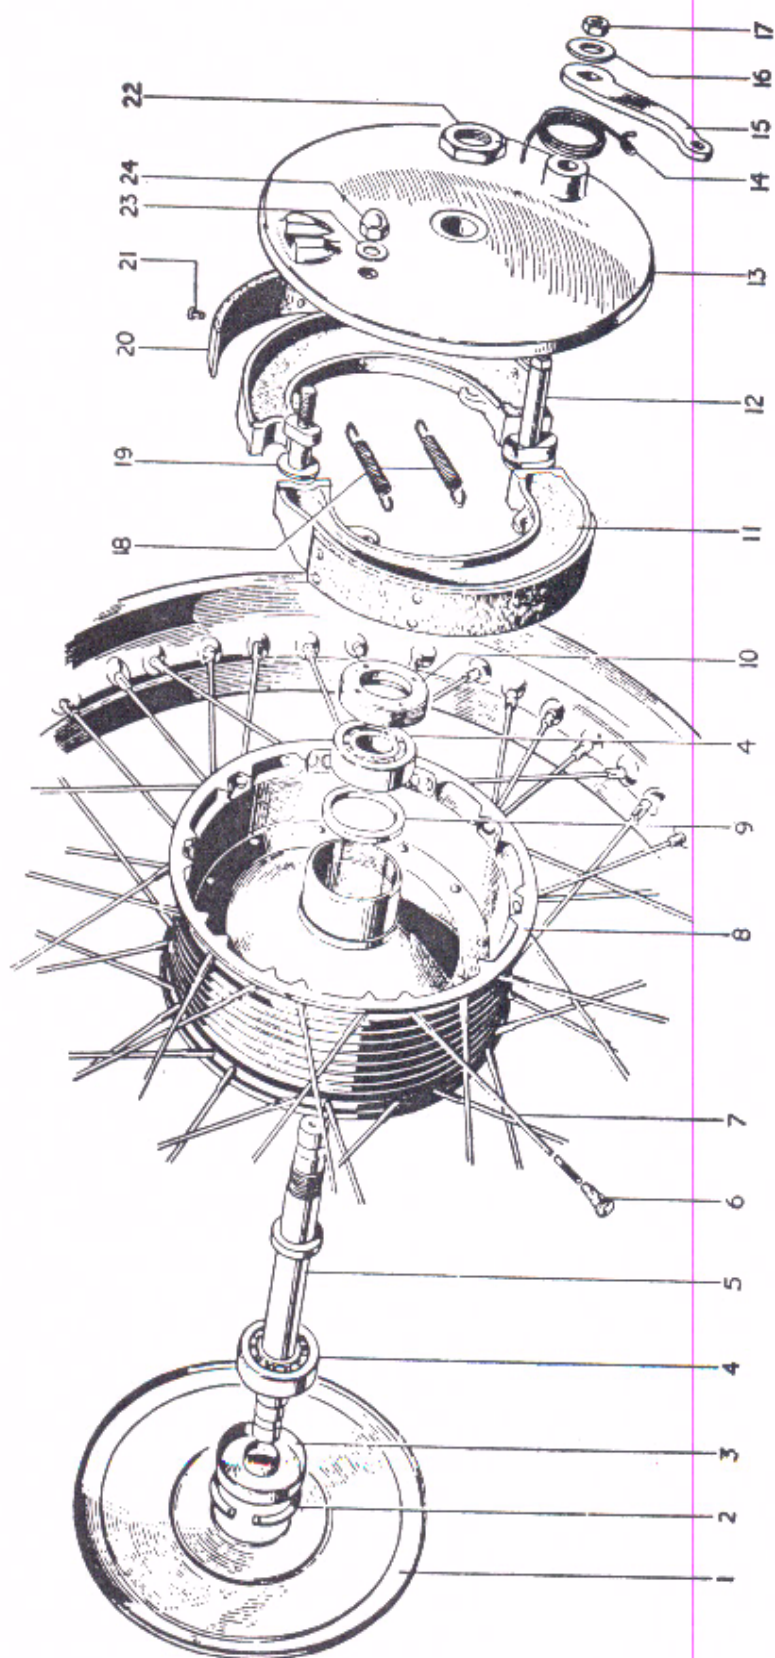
FRONT WHEEL WITH FULL WIDTH HUB.
